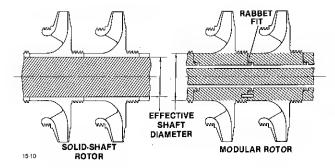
Comparison of Solid-Shaft Rotor with Modular
